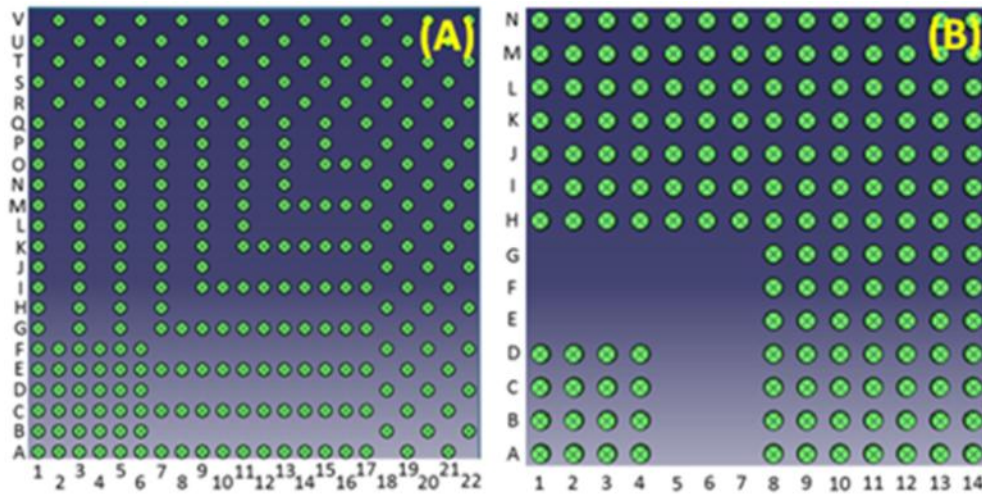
BGA solder layout in (A) MCH package and (B) ICH package
